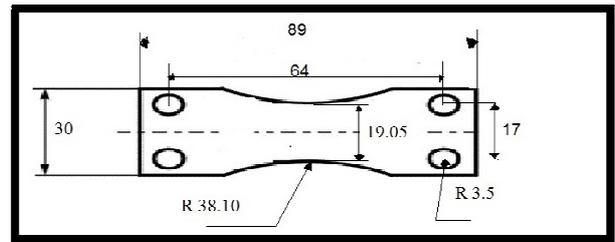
Shape and dimensions of fatigue specimen (all dimensions in mm) according to ASTM D3479/D3479M-96 standard
